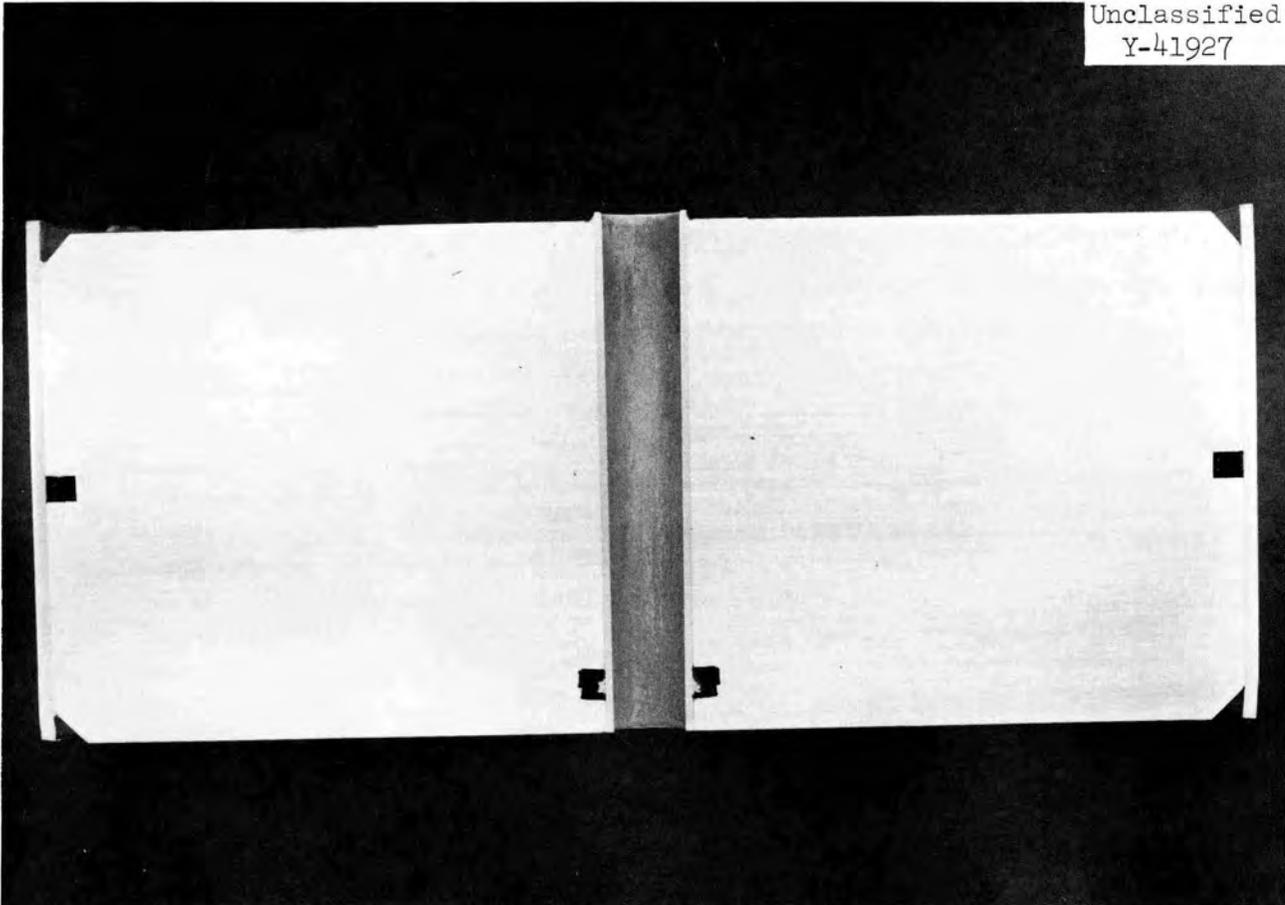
Cross-Sectional View of a Single Disk Section of a Boiler Job Sample after Brazing with Can and Tube in Place.
